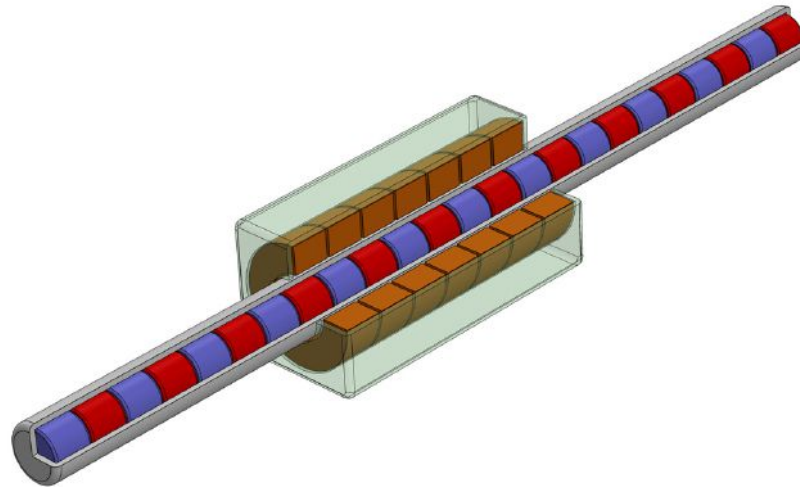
Linear Brushless DC Motor with Rod-Shaped Rotor
